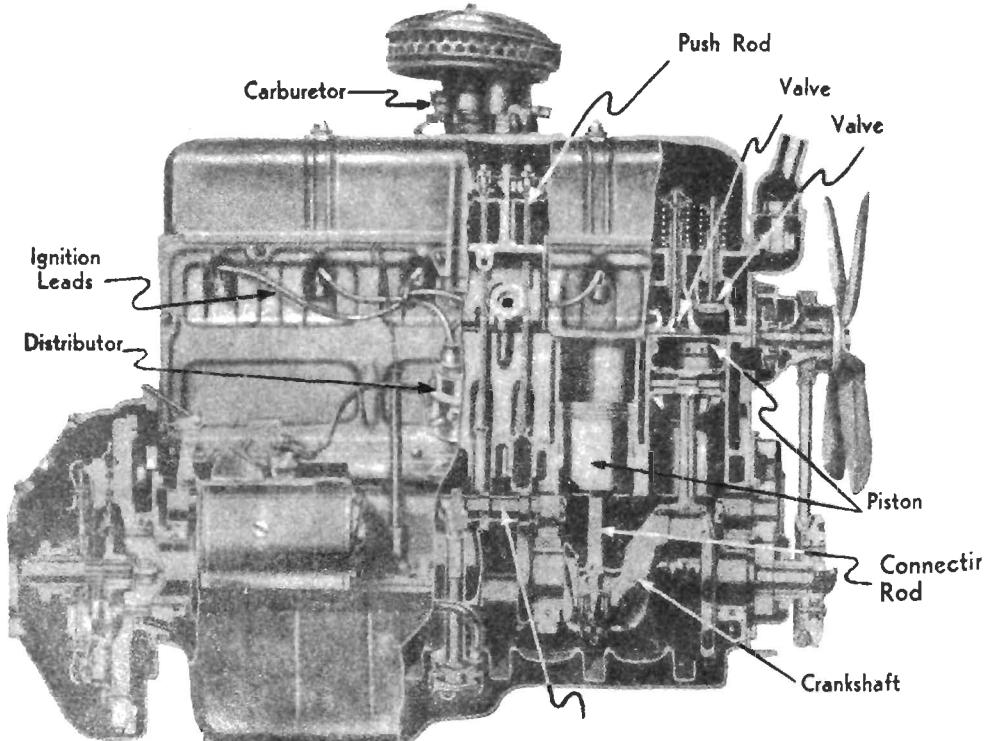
(a). "In-line" type spark ignition automobile engine
